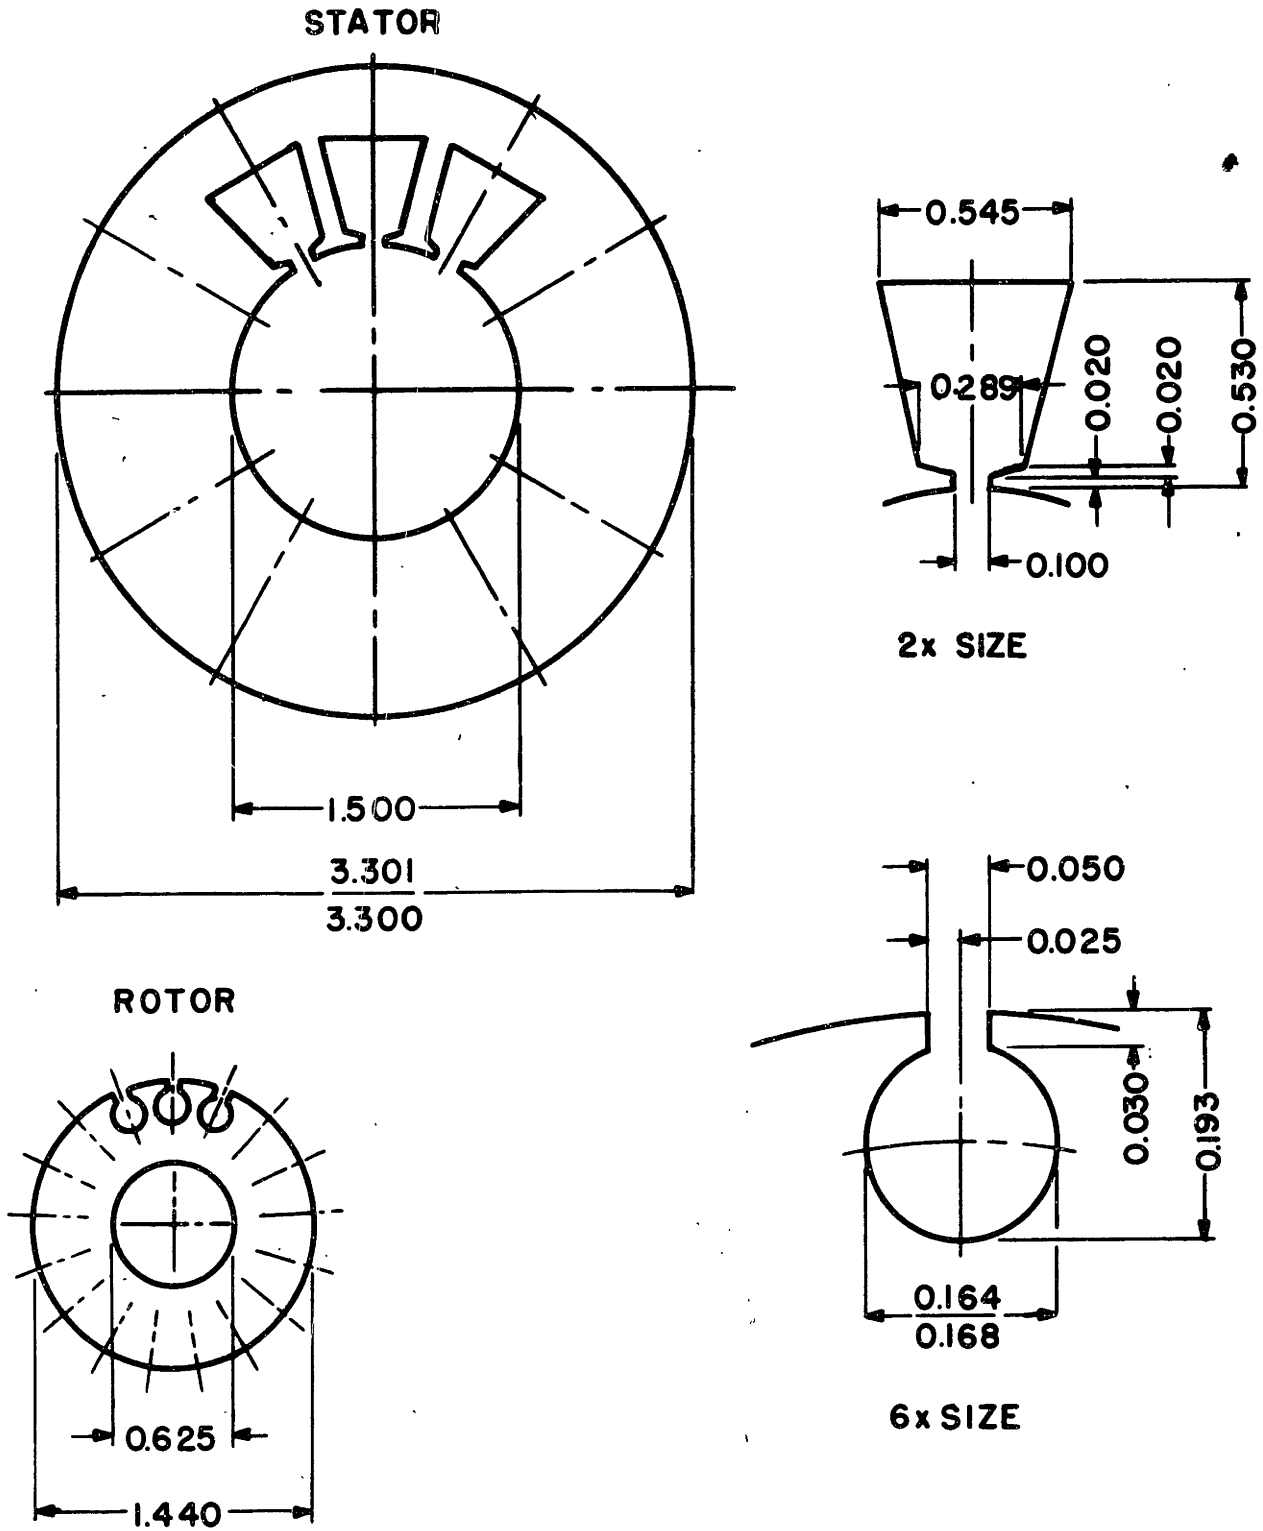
Drawing of the stator and rotor laminations of the induction machine
